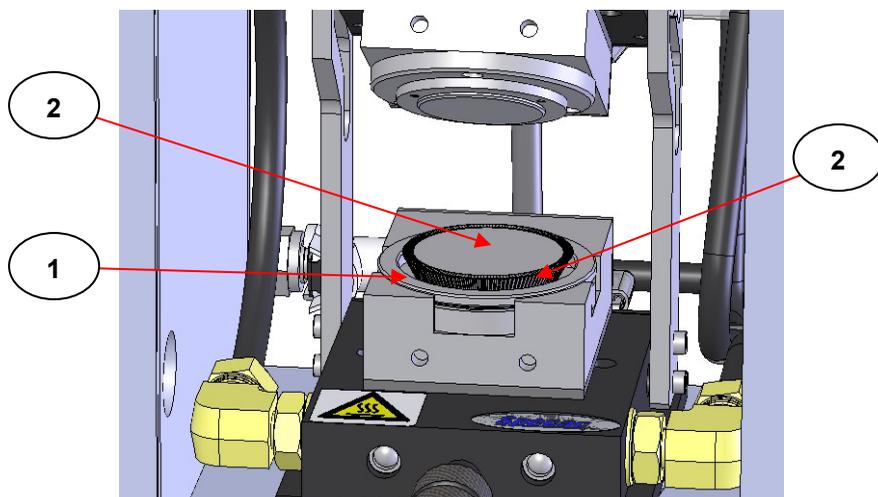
Lower Aluminium Sample Cup, Sample and Cover Positioned in Lower Heated Pressing Surface Assembly
